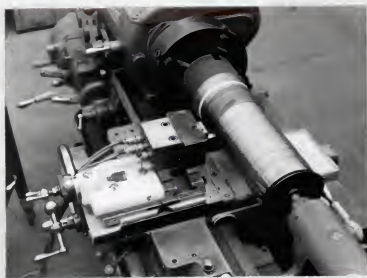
(c). Photograph showing the tool-post lathe dynamometer and the Nodular Iron workpiece mounted on the lathe.
